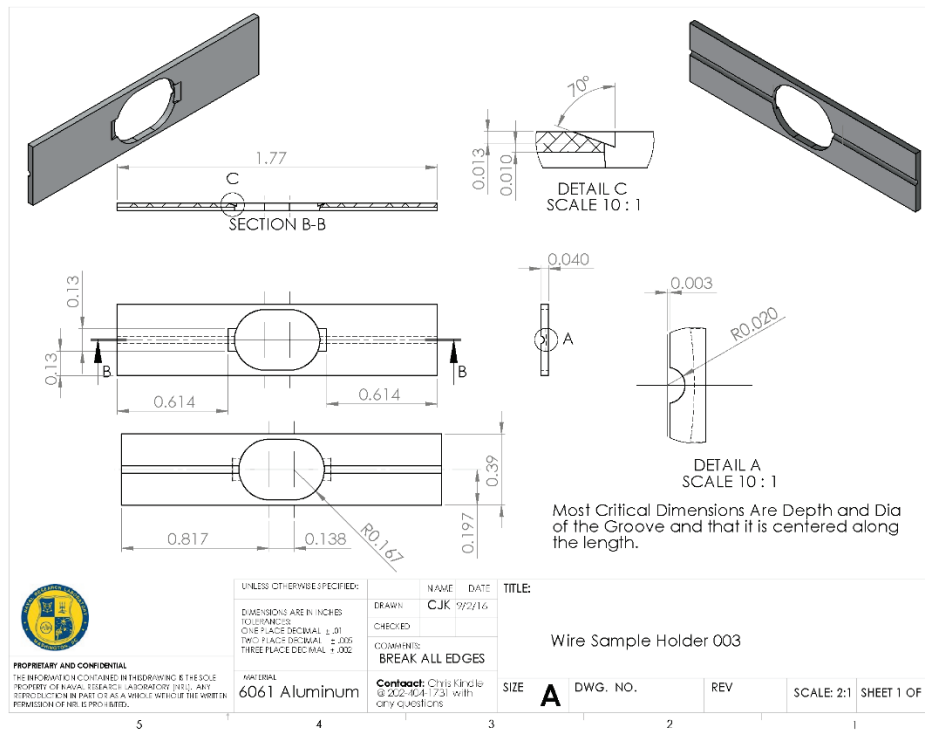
Machining drawing for the final tab design for the SEMTester wire tensile specimens.
